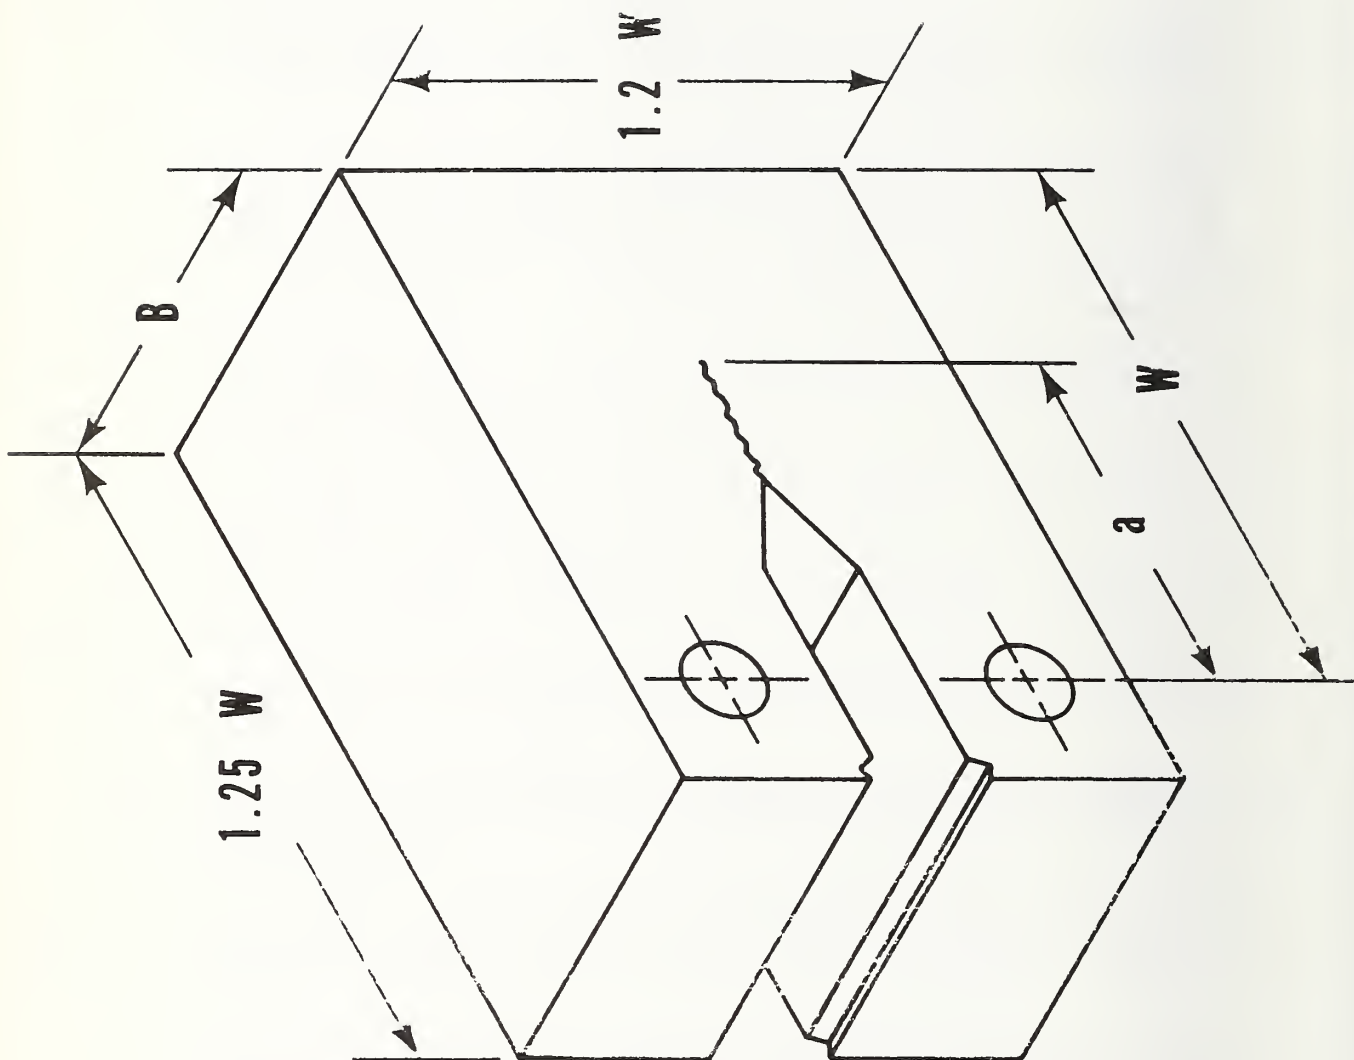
ASTM E399 Compact Specimen for Fracture Toughness Testing [10].
